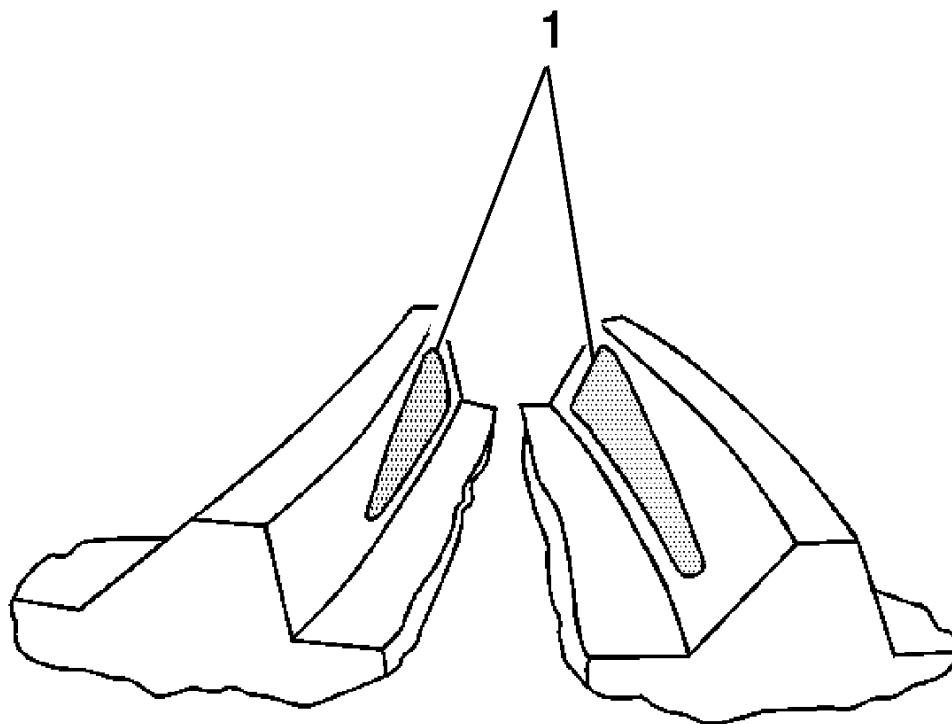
Identifying Drive Side Toe - Coast Side Toe Contact Pattern
